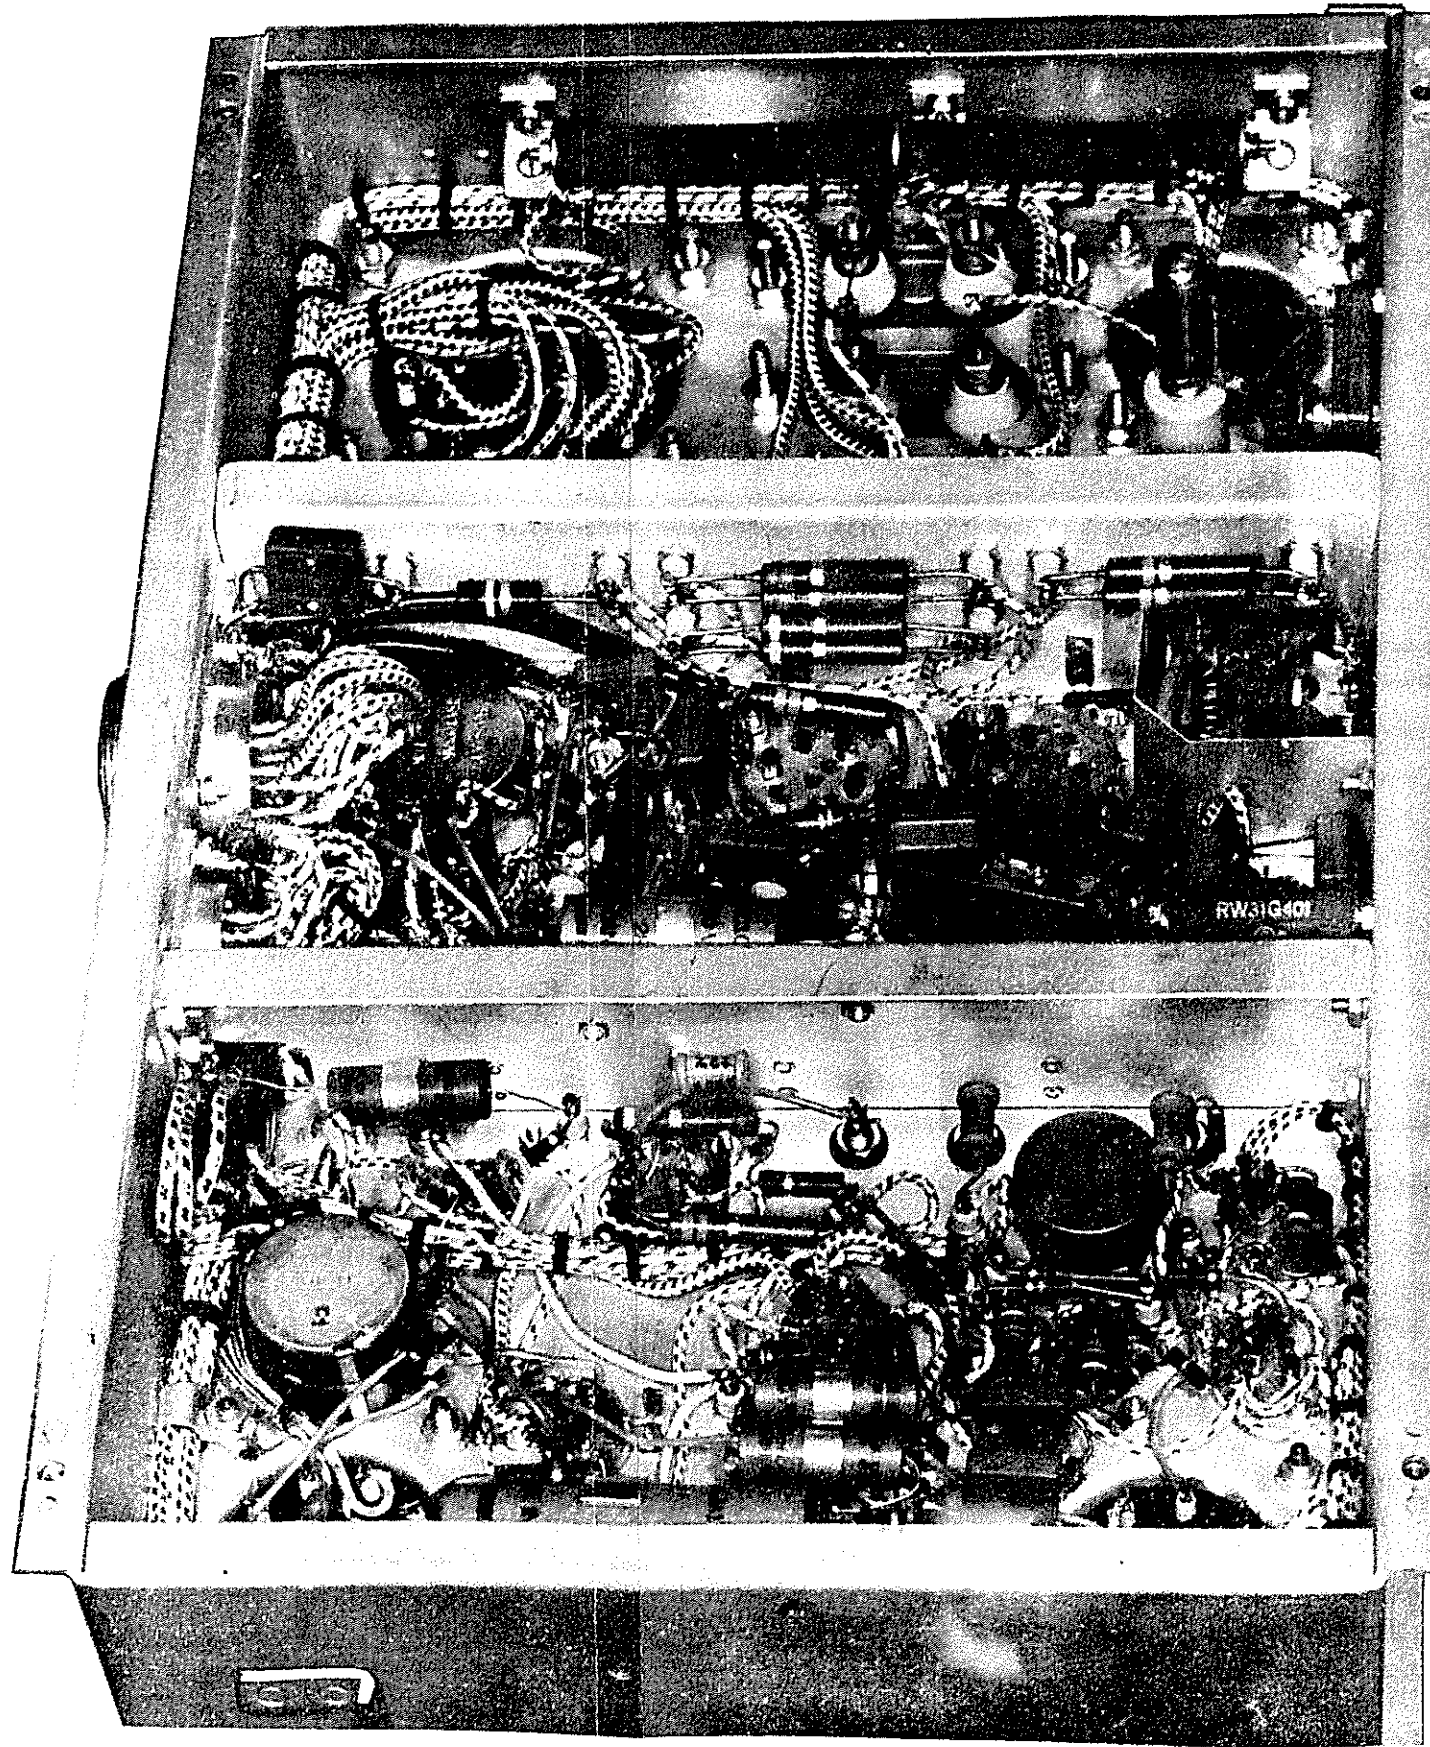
Transmitter Sub-Assembly, Left Oblique Rear View, Showing Wiring
